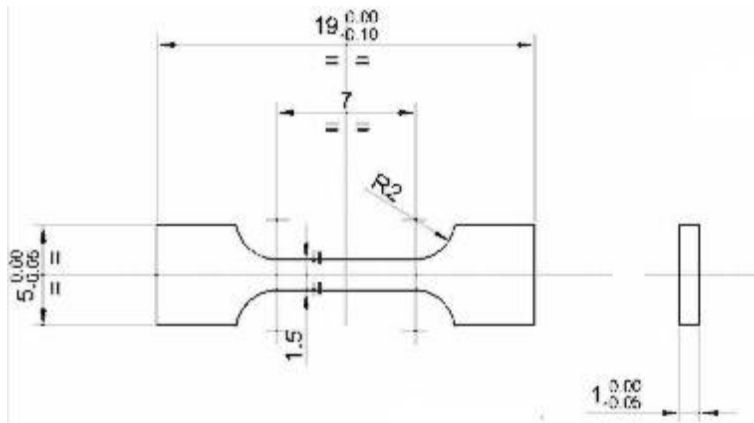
Tensile specimen (T 19-type), drawing by CEA.
